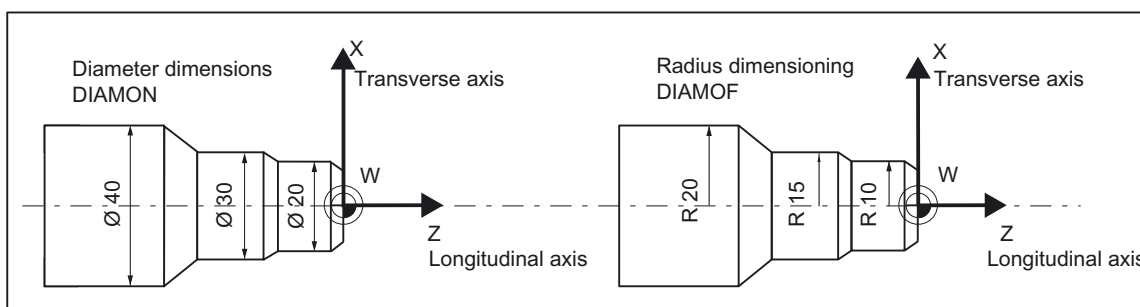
Diameter and radius dimensioning for the transverse axis
